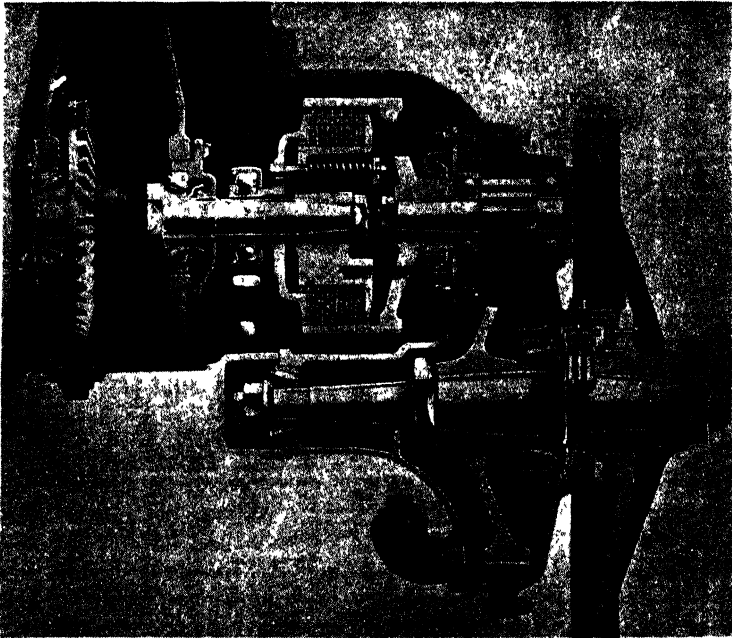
CATERPILLAR "CLUTCH-BRAKE" STEERING GEAR.
